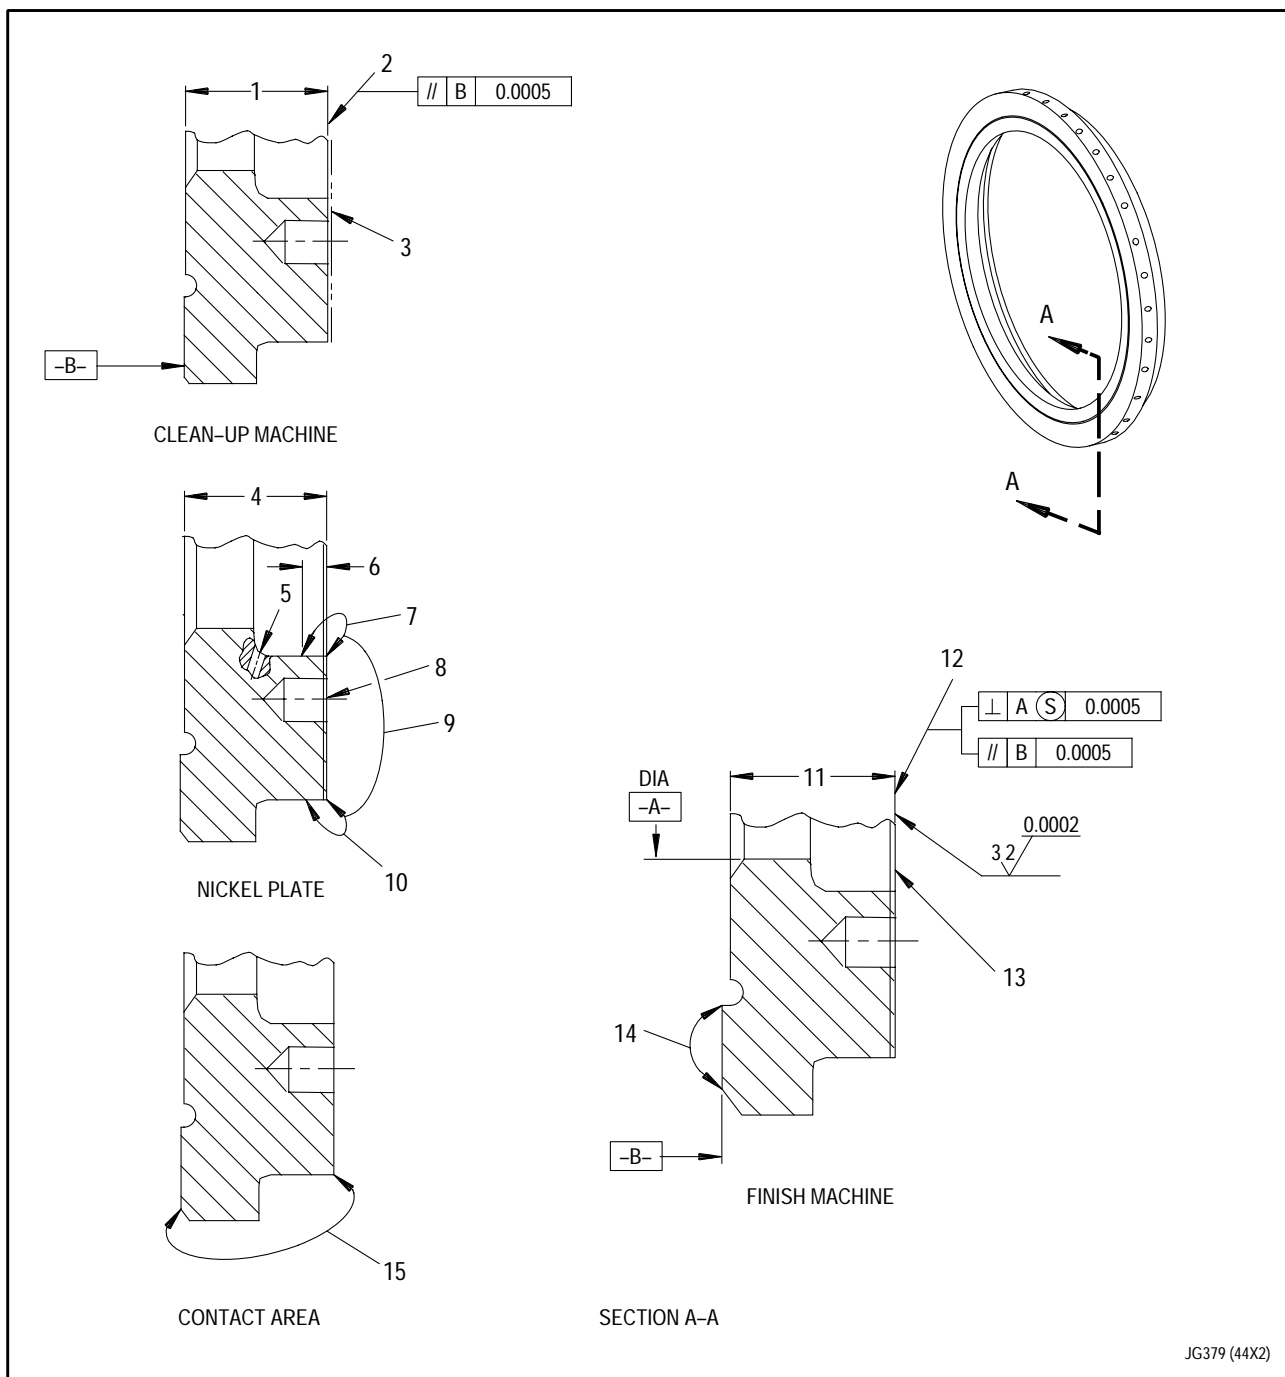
No. 2 Bearing Front Seal Seat - Nickel Plate Repair of Rear Inner Face
